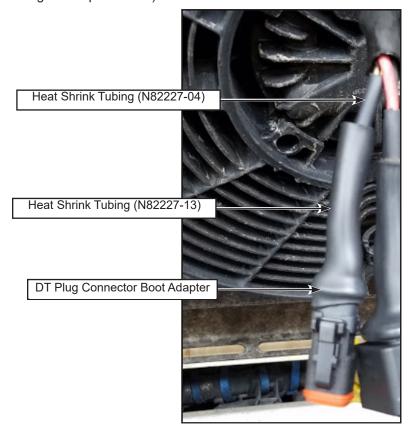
Heat Shrink Tubing Installation on DT Plug Connector Wiring at Fan Side
